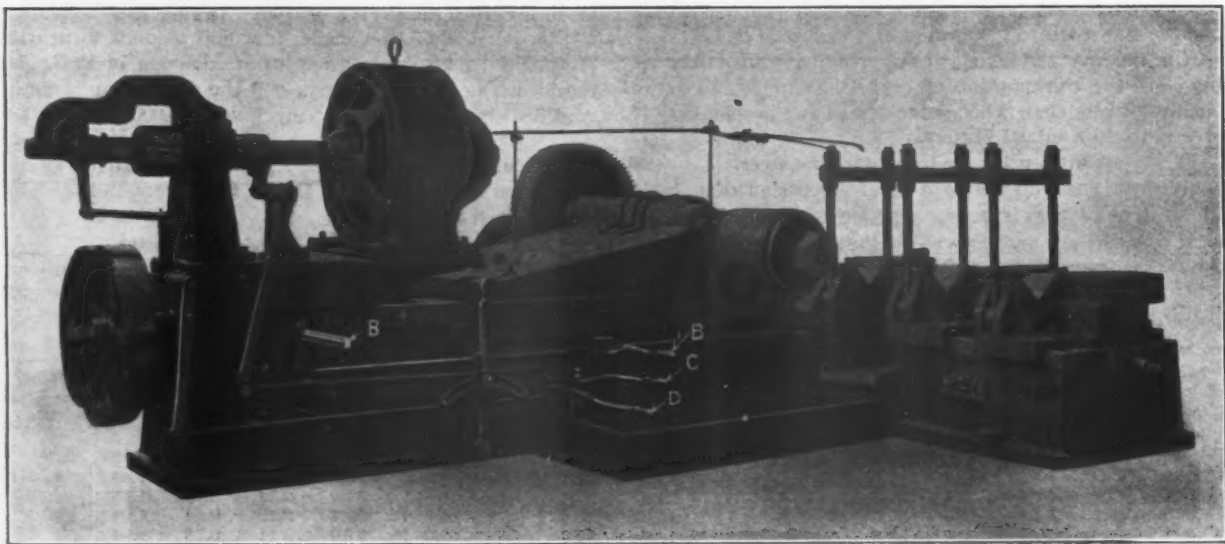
Opposite Side of the Machine, Showing the Controlling Levers.
